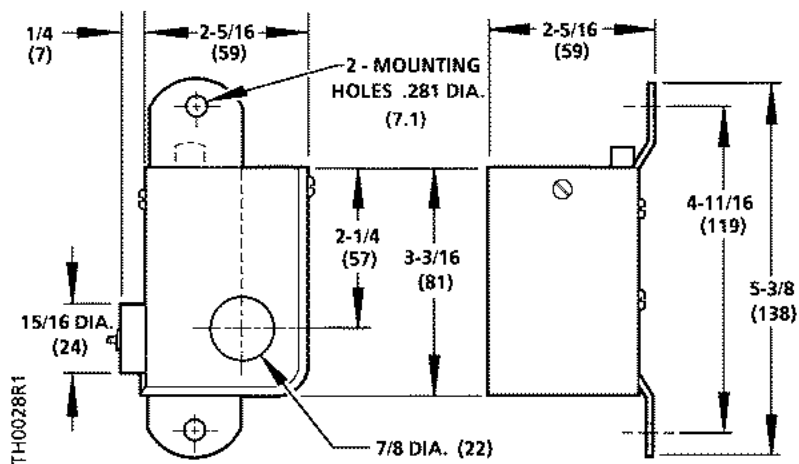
Dimensions of the 134-1510 and 134-1511 Thermostat.
